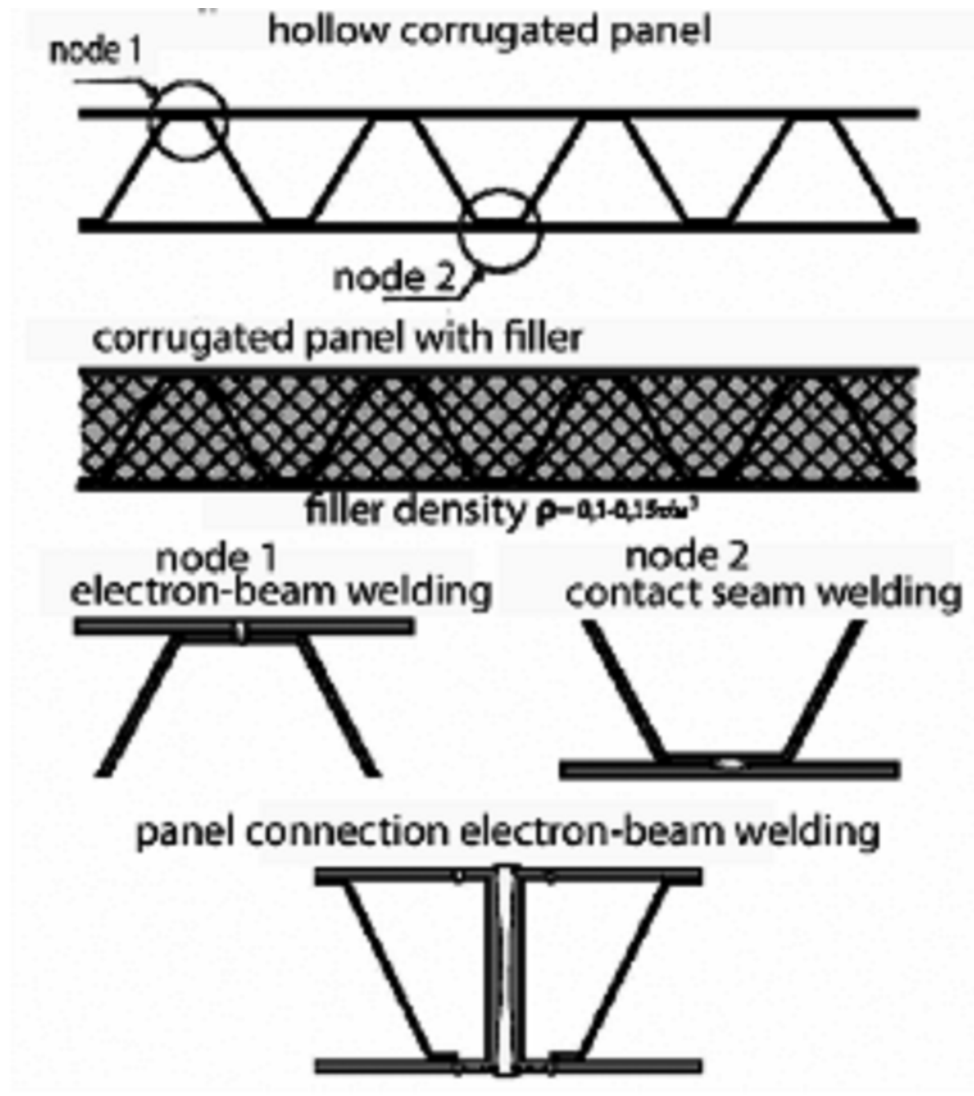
Electron beam welding of panels (Kryzhevich et al., 2005).
